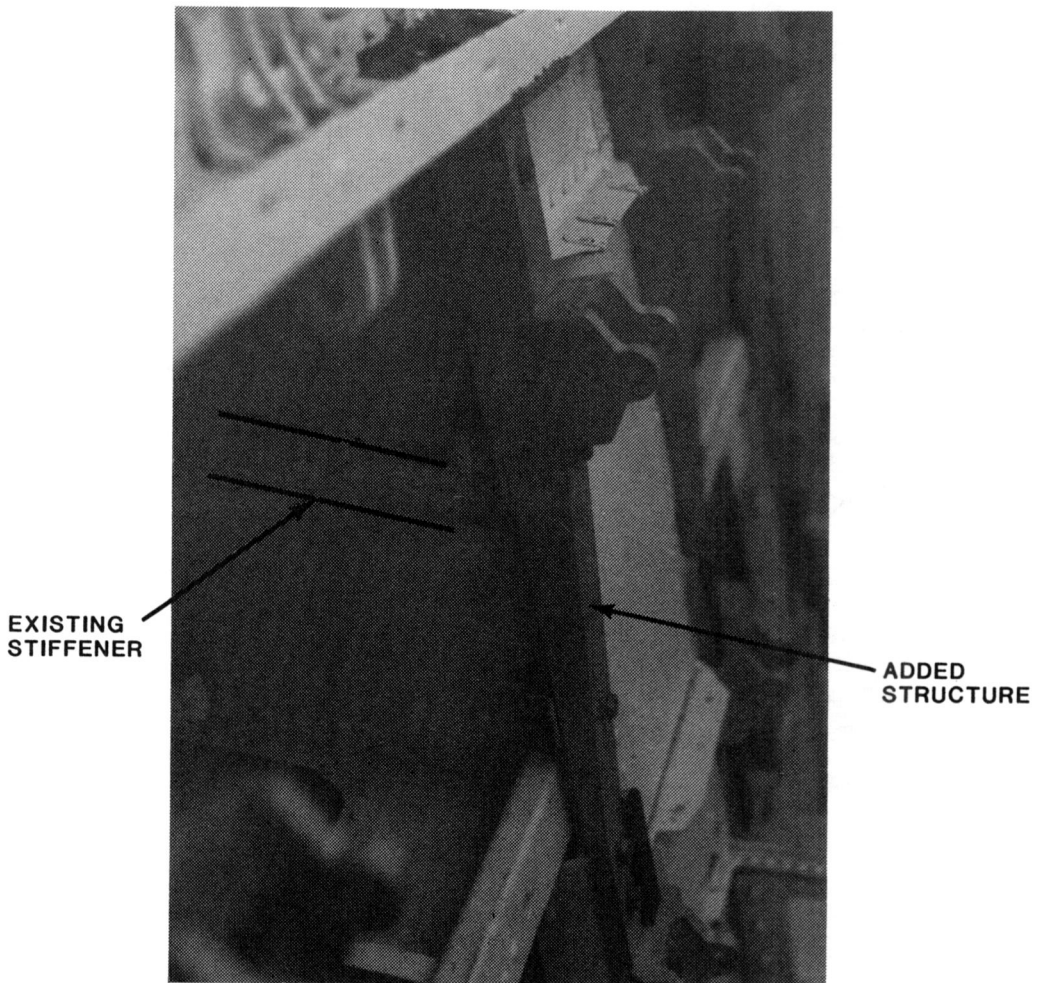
Upper bearing attachment on WSO inboard side during crew module tests.
